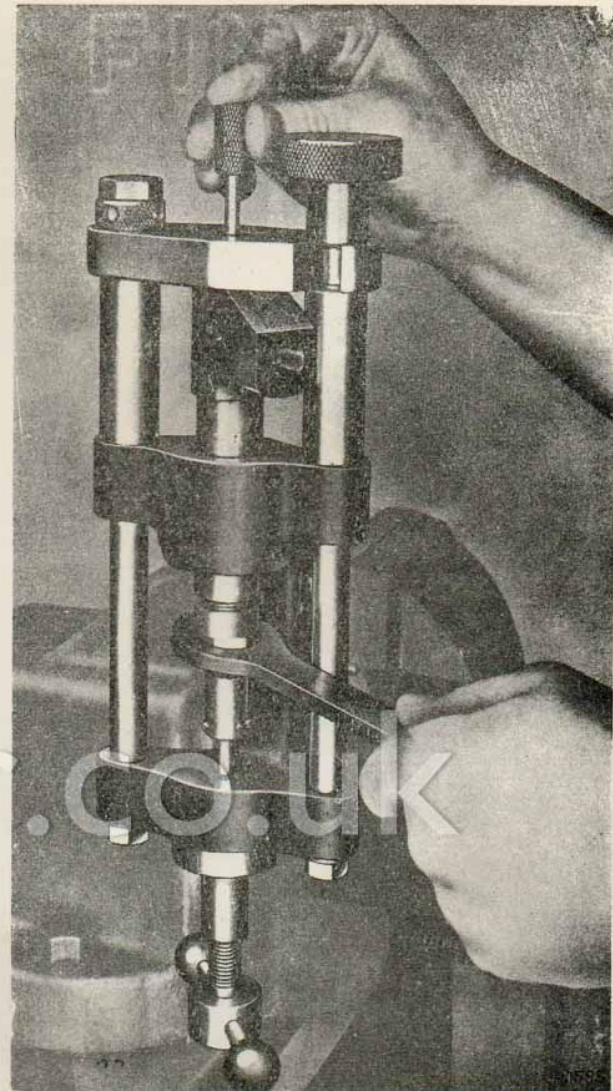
TIGHTENING THE NOZZLE LOCKNUT.
